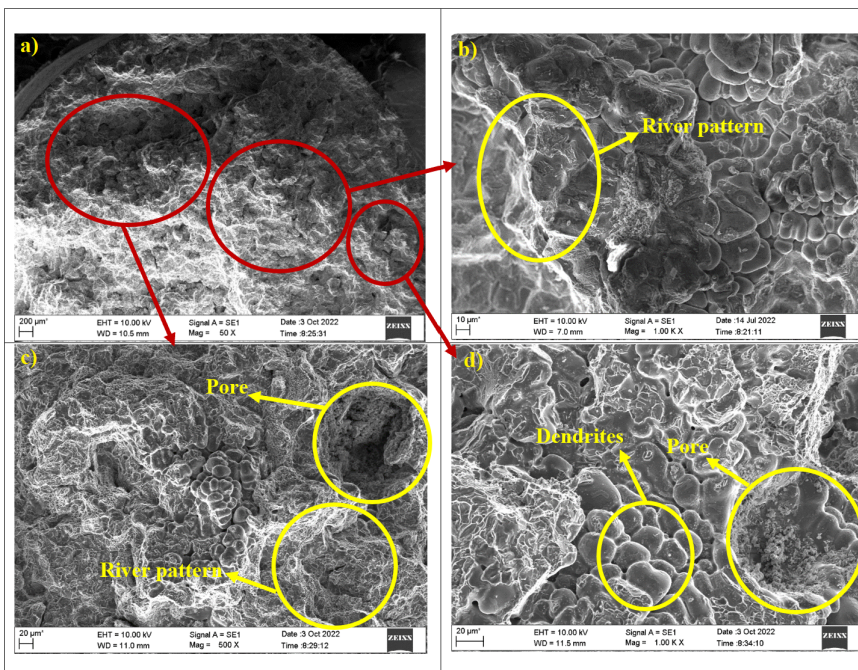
SEM micrographs of fracture surface of C5 tensile specimen after fracture.
